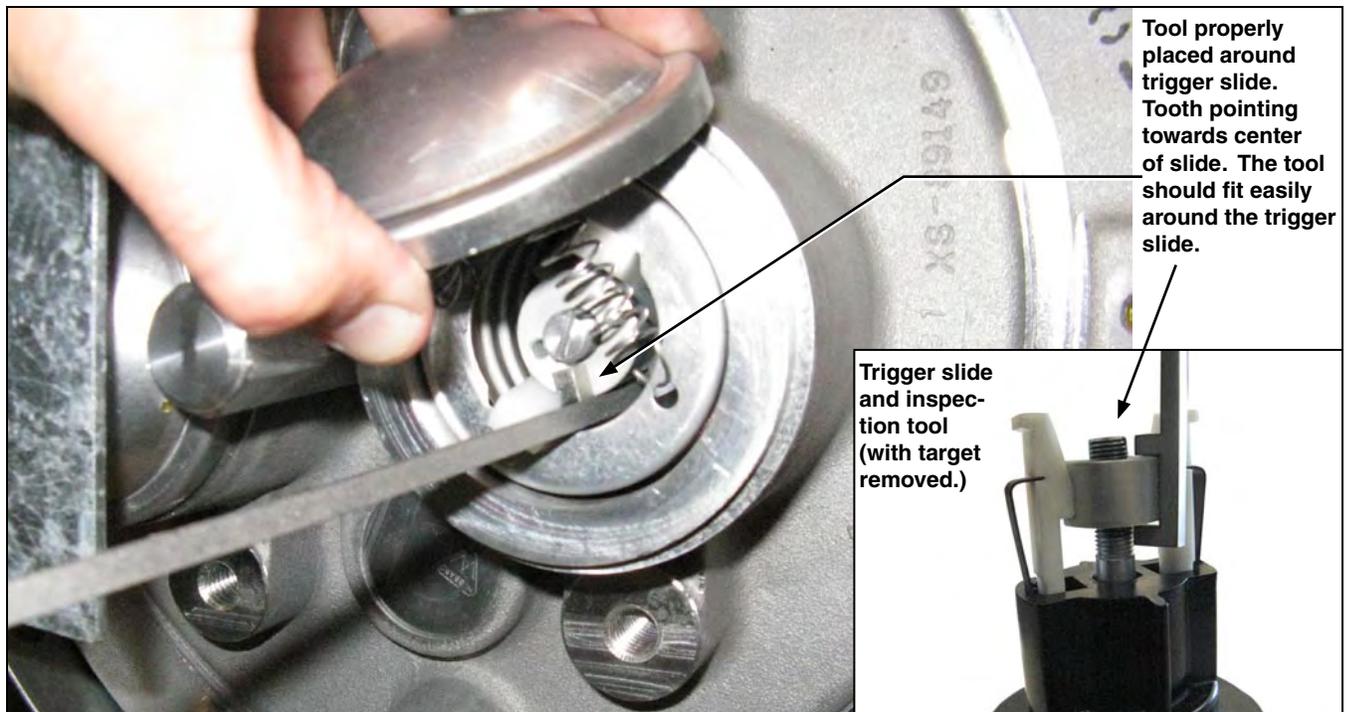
Rotate the tool until the top tooth is pointing inward. Inspect the trigger slide on both sides of the latch fingers. If the inspection tool can be inserted easily into the indicator housing, and fits around the trigger slide, the indicator assembly is in working condition and the interrupter can be returned to service.
